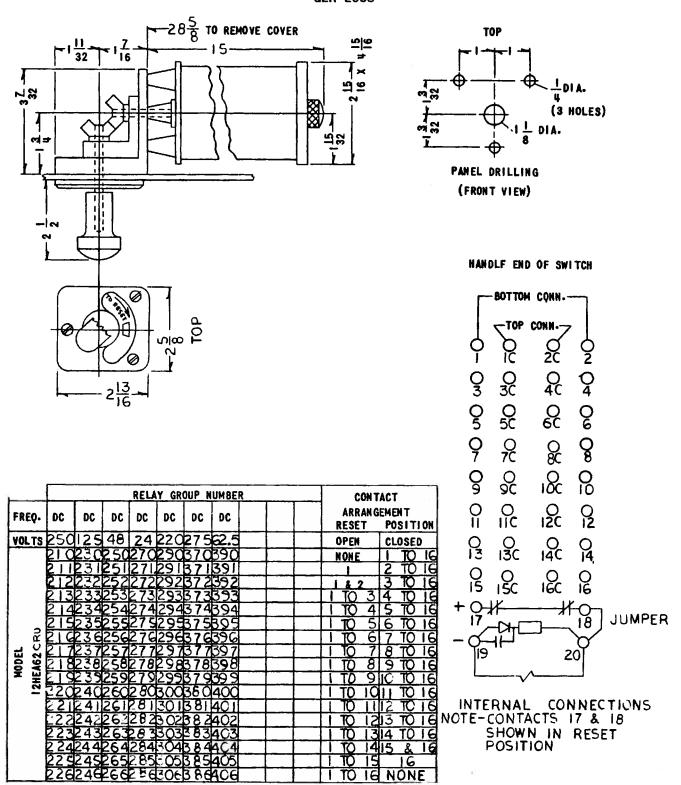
D (0246A2250-1) Outline, Panel Drilling and Internal Connections for Relay HEA62CRU
